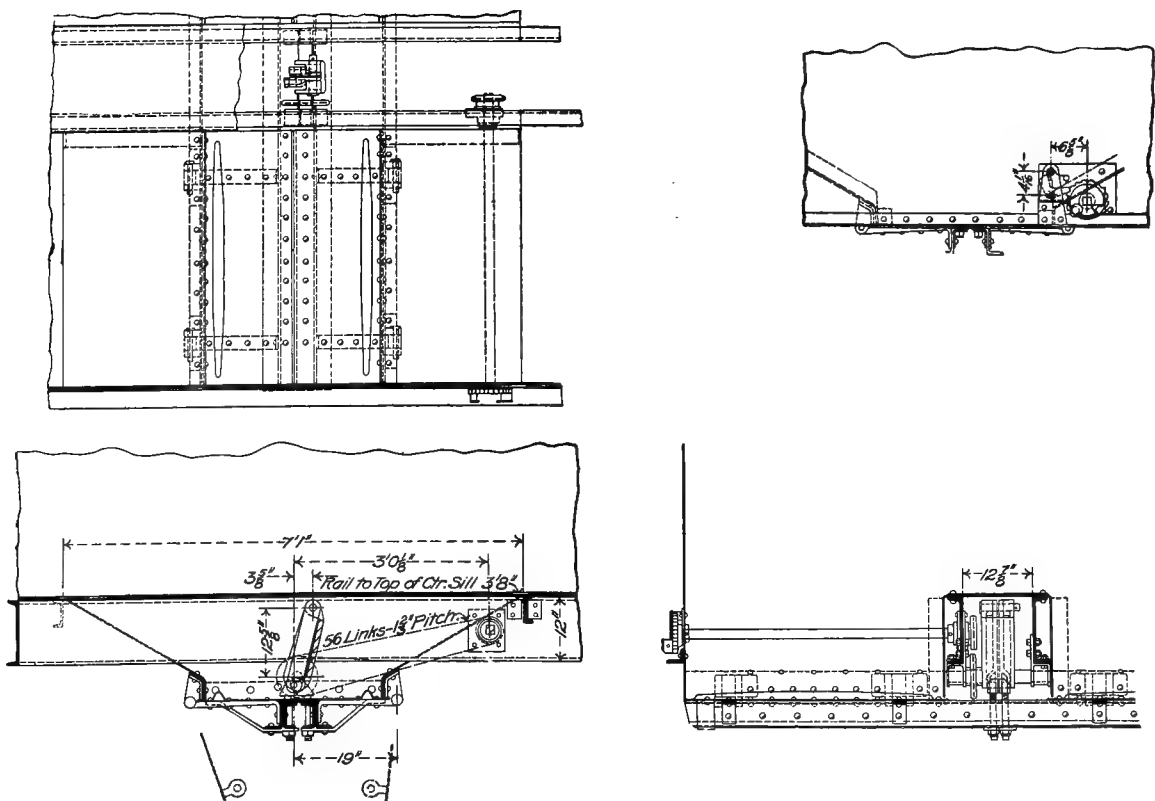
Dunham Drop Door Apparatus for All-Steel Hopper Bottom Gondola Car. U. S. Metal & Manufacturing Company.
